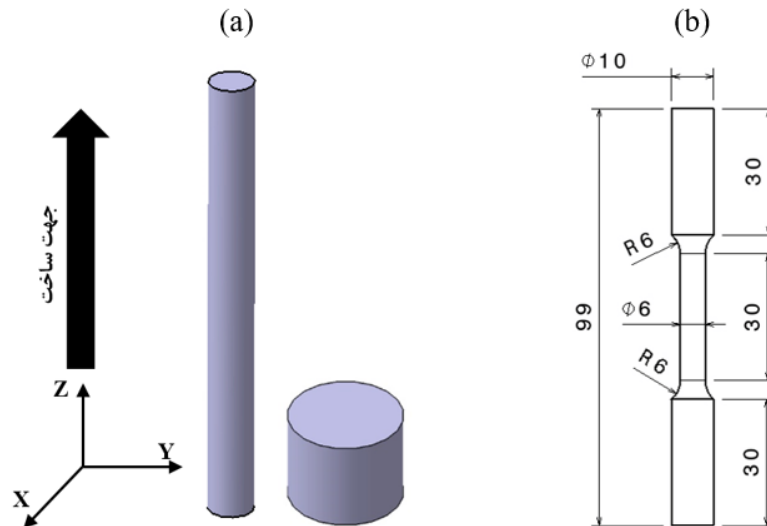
(a) Samples fabricated using the Selective Laser Melting method, (b) Dimensions of the standard tensile test specimen after machining.
